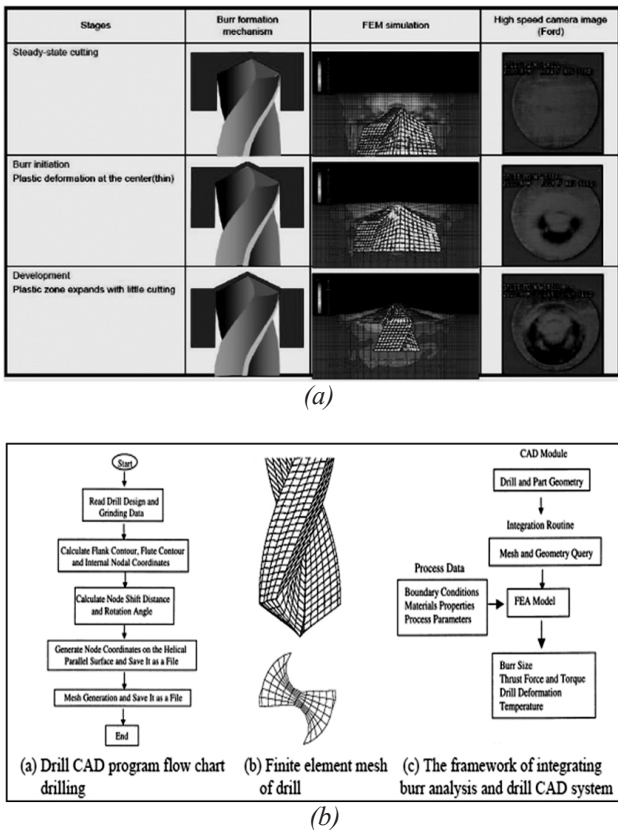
Finite element simulation of burr formation in drilling machining (b) Automatic mesh generation for drill geometry and CAD/FEA integration.
